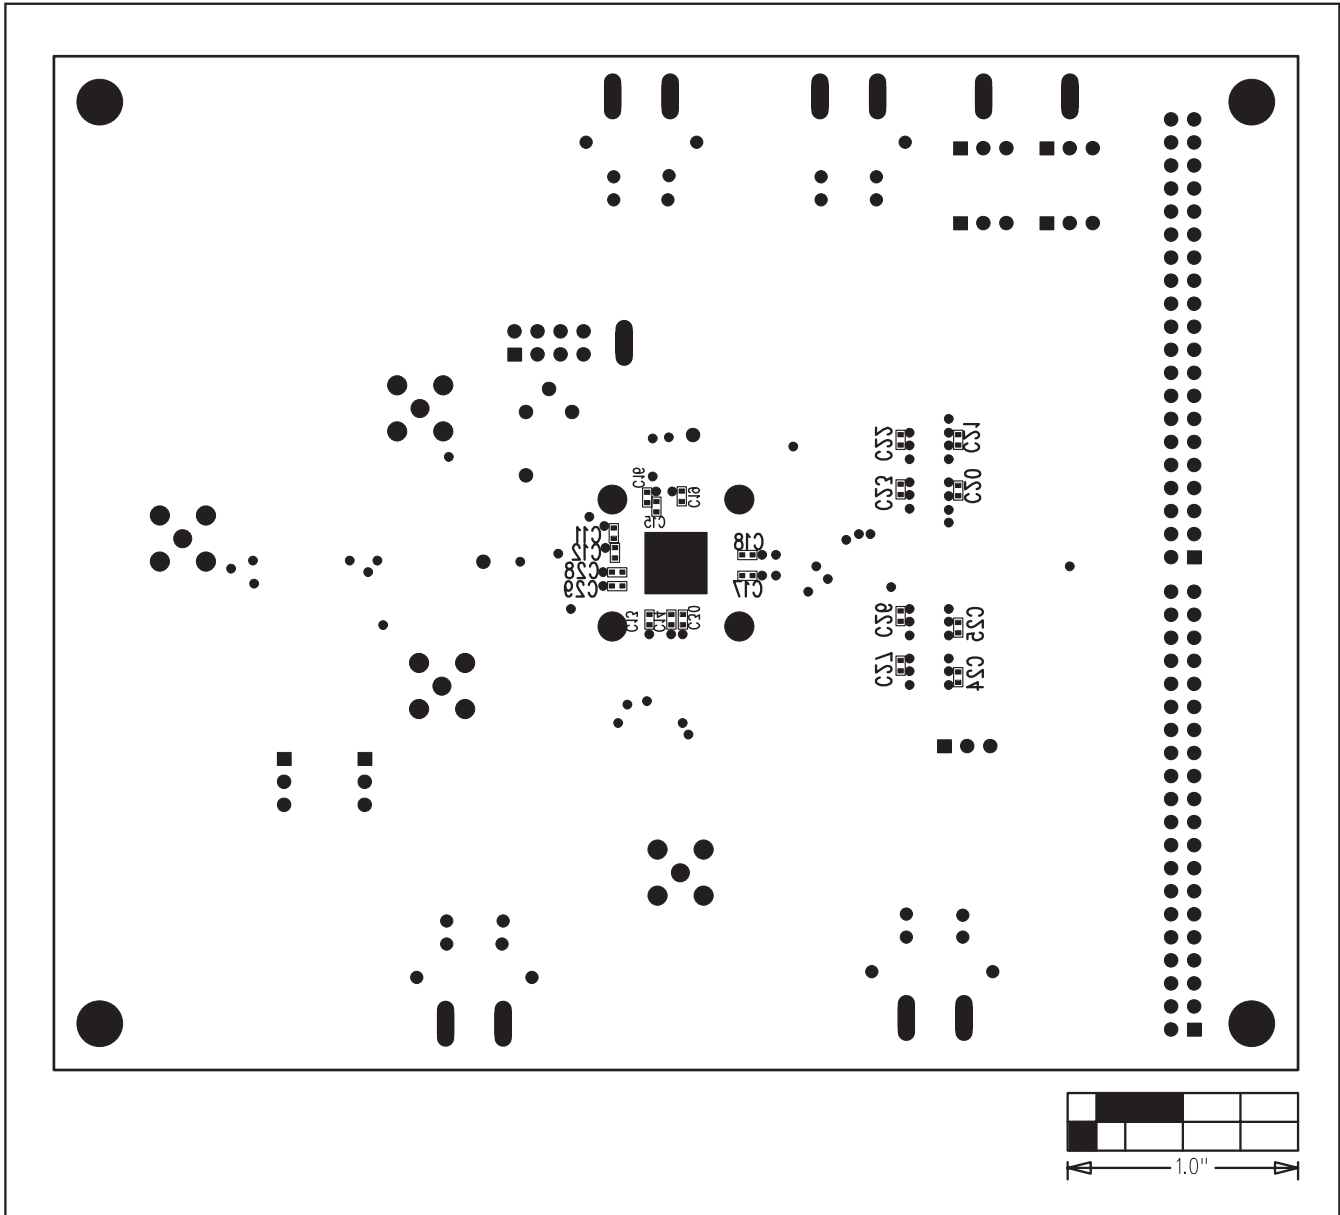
MAX19542 EV Component Placement Guide—Solder Side
